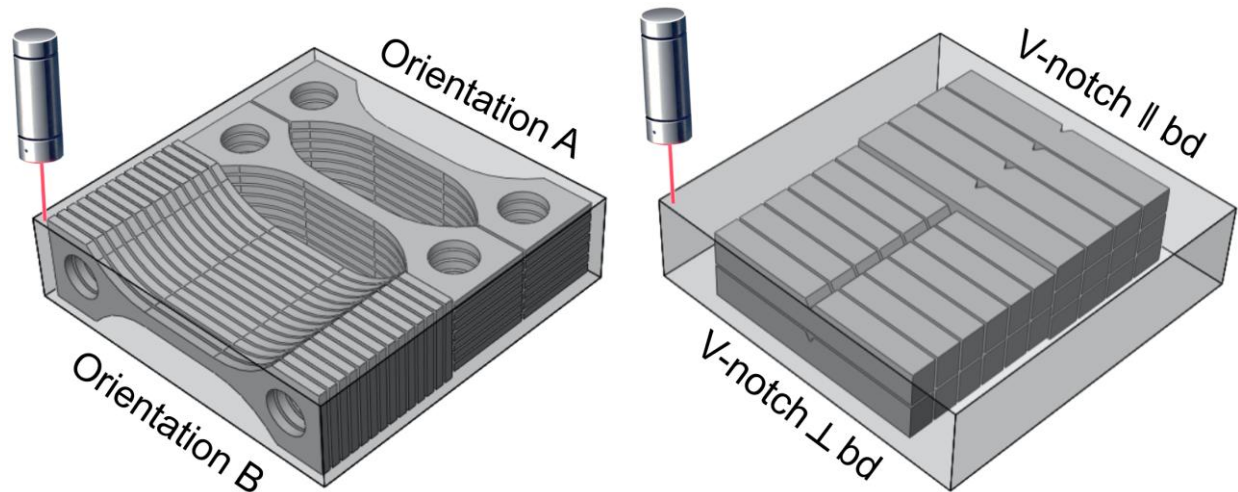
Schematic of specimens cutting for (a) tensile and (b) Charpy impact tests
